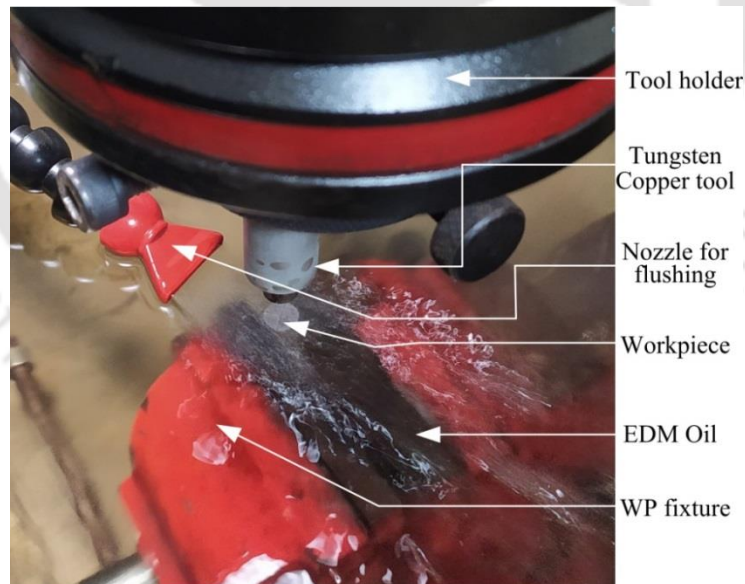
Fabrication of cruciform-shaped thin gimbal flexure by EDM
